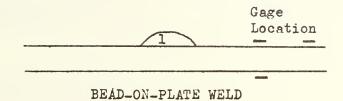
WELDING PASS SEQUENCE.
